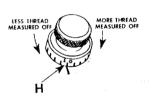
Threading Measuring Device on Machines 240W2 and 240W4
